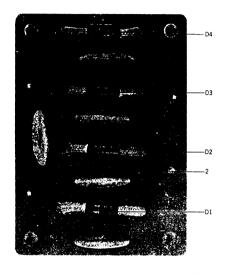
PHOTO OF REGULATOR P.C. BOARD (98-5084)
